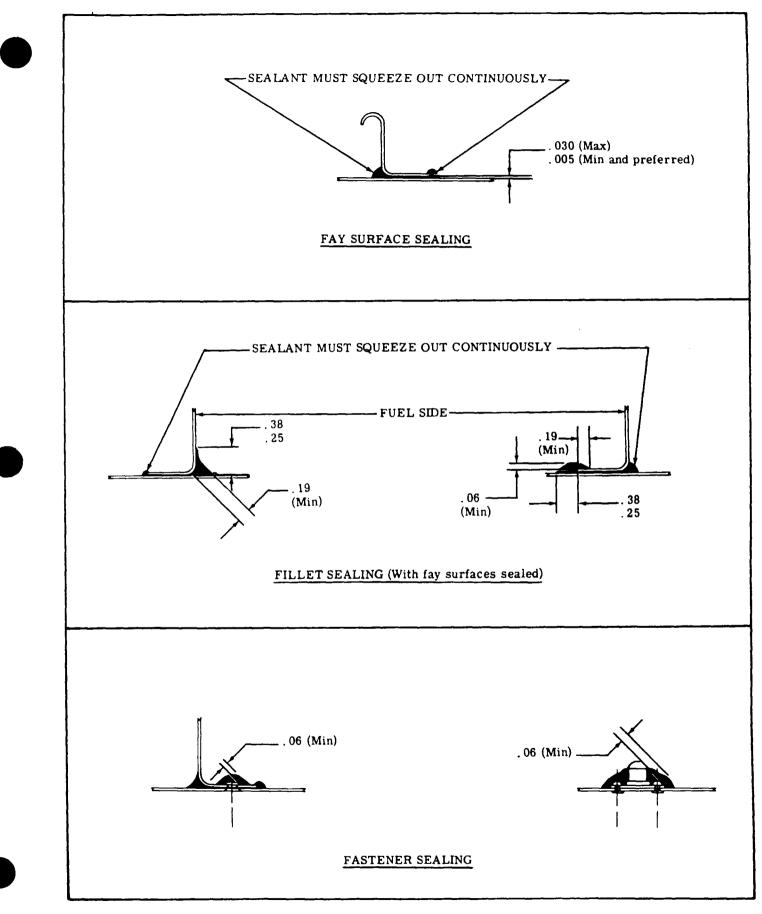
Fuel Bay Sealing (Sheet 2 of 2)
